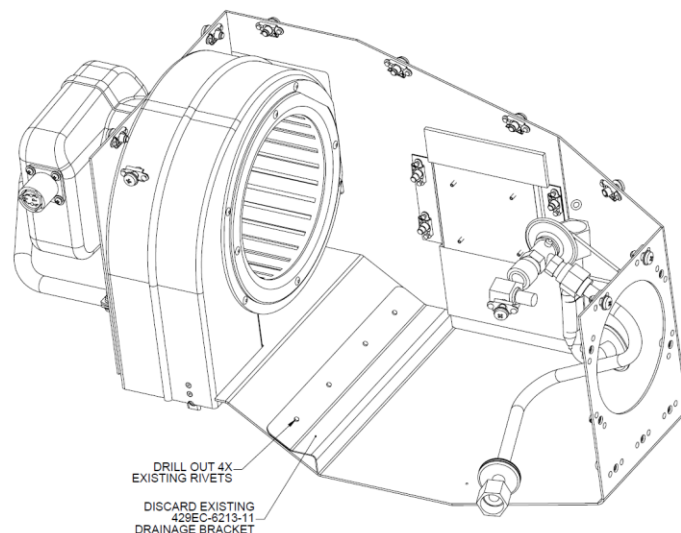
Remove 429EC-6213-11 Drainage Bracket
